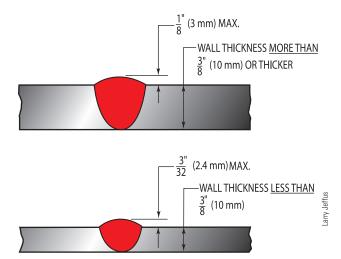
Excessively large weld beads prevent the pipe from uniformly expanding under pressure. This restriction from expanding can cause a failure to occur in or near the weld.
